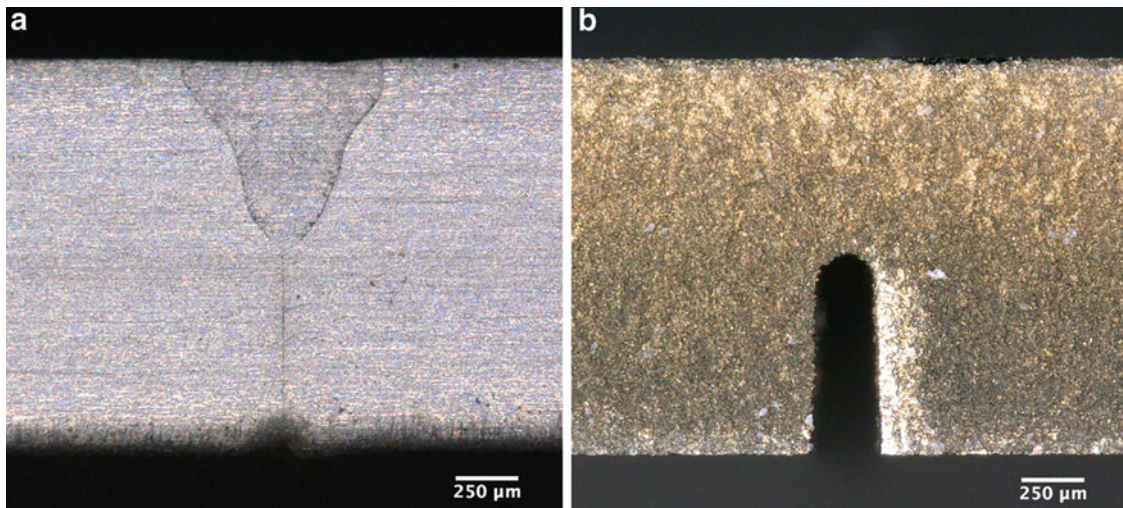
(a) Cross-section of a 0.763-mm deep partial penetration laser weld in 1.532-mm thick 304L SS sheet with the laser weld having a keyhole shape and an unwelded ligament (the vertical line below the laser weld); (b) Cross-section of an EDM-notched 304L SS sheet with 0.236-mm notch width and a 0.789-mm notch depth that is similar to the unwelded ligament in the laser welded specimens
